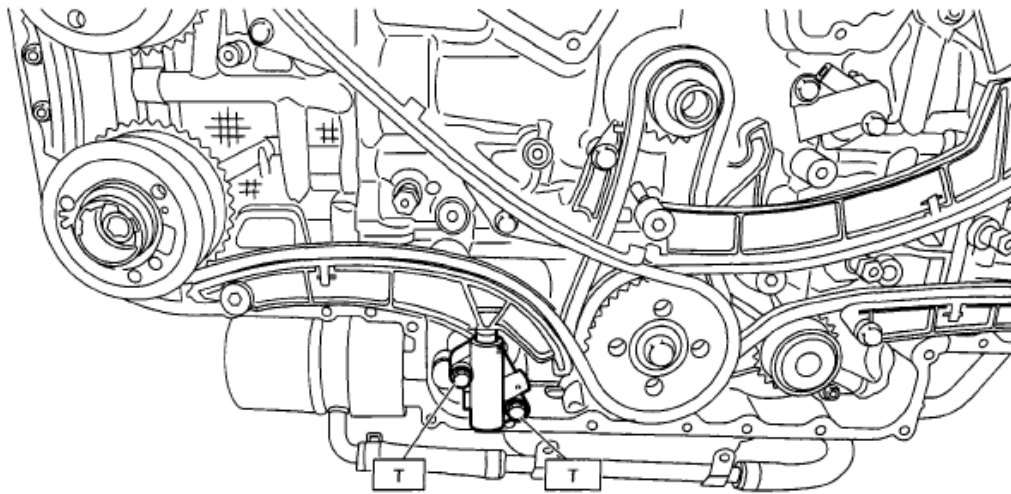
Identifying Install Chain Tensioner Lever (RH) Bolts Tightening Torque
